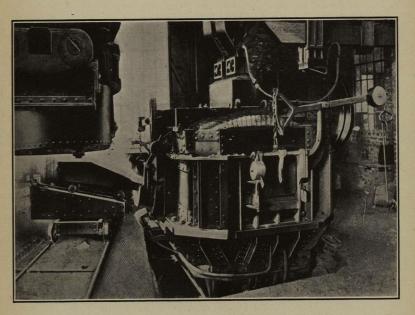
Keller's Conducting Hearth Furnace being charged with molten metal.
